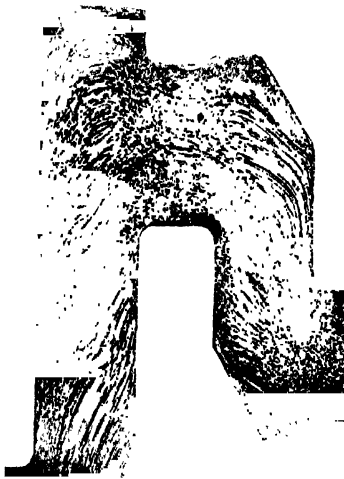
Section of Steel Forging (Crank-shaft), etched with Cupric Reagent.
